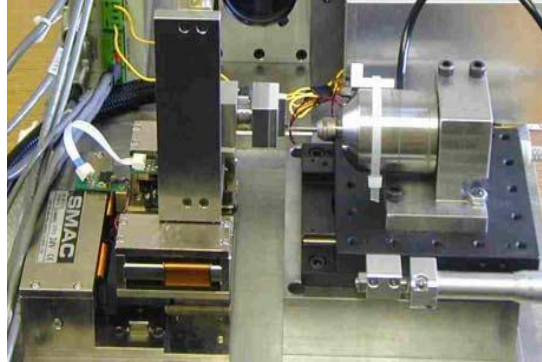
The Micro/Meso-scale machine tool made by Vogler [11]
